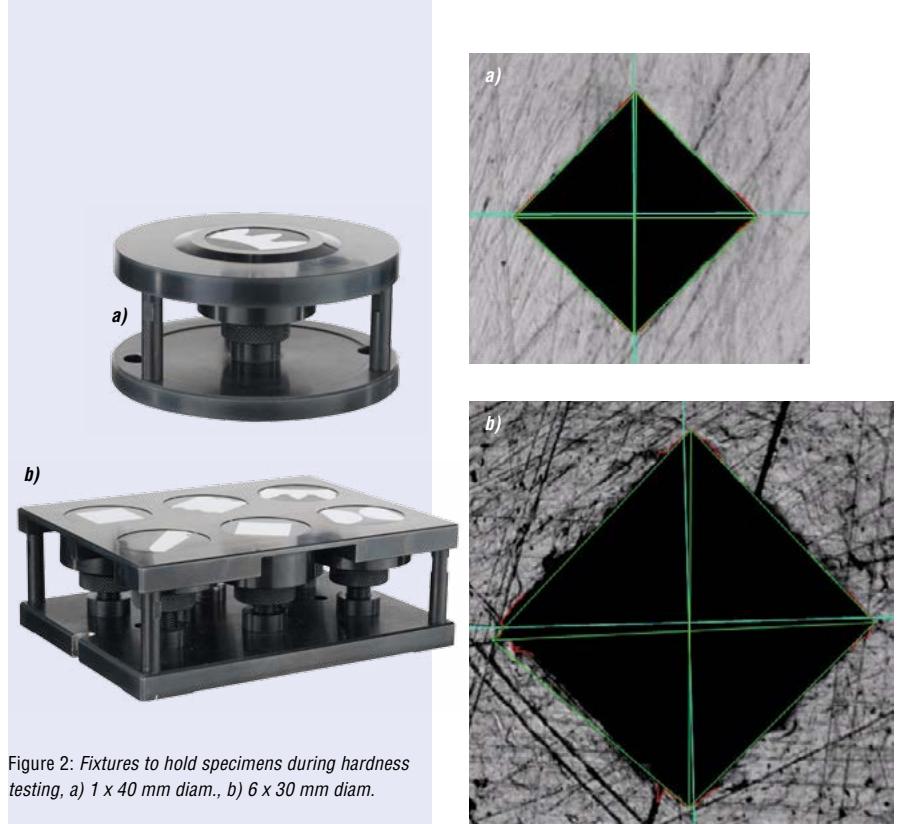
Fixtures to hold specimens during hardness testing, a) 1 x 40 mm diam., b) 6 x 30 mm diam.
